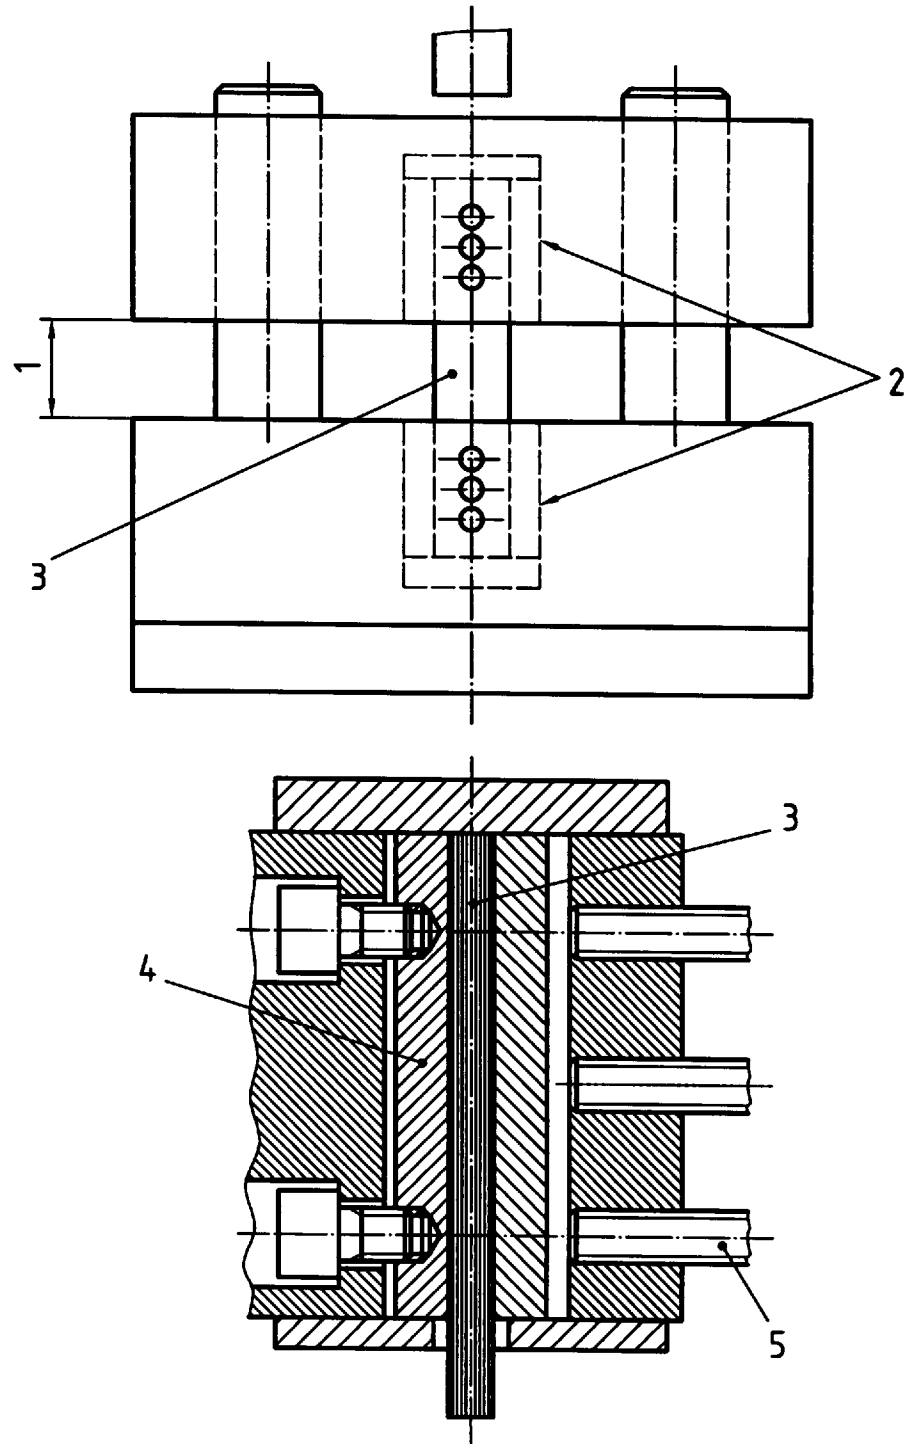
ASTM D 3410/B (ITTRI) test fixture
